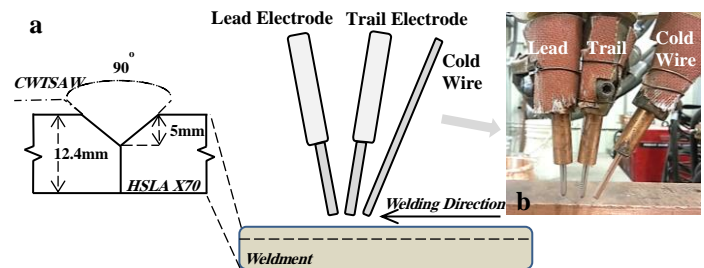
CWTSAW process setup. (a) Schematic view of joint configuration along with the positioning of the electrodes and cold wire and (b) welding setup designed at Evraz Inc. NA
